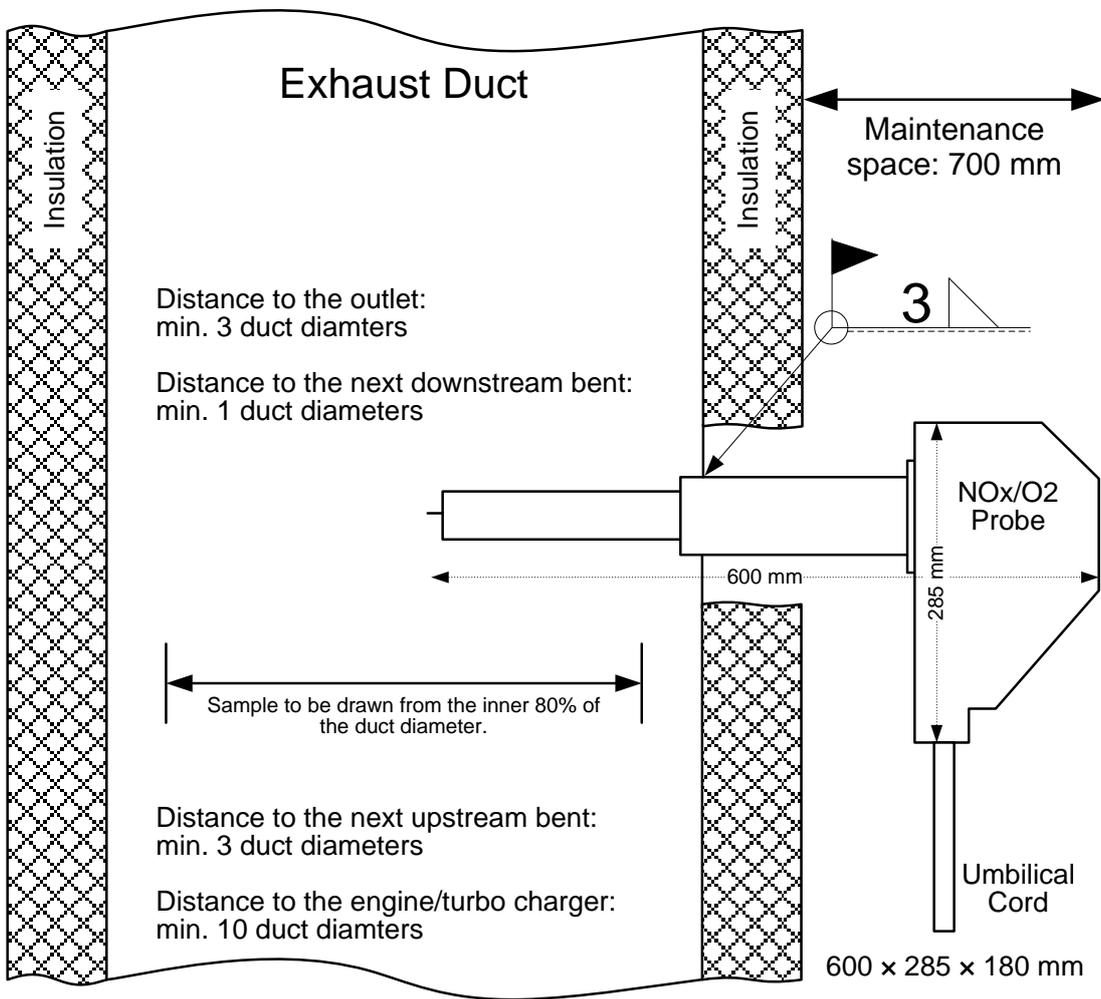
Installation layout of the diffusion probe – welding type
